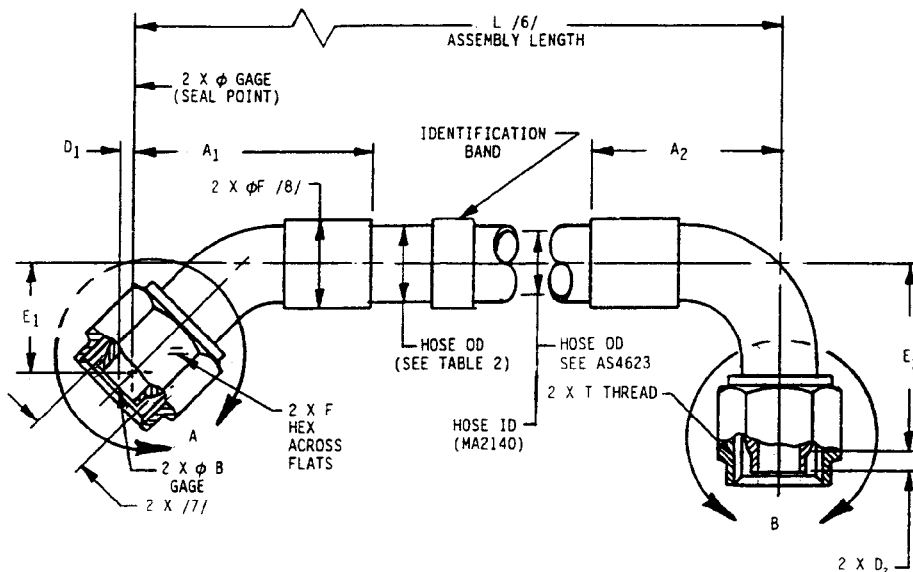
HOSE ASSEMBLY, 45° ELBOW TO 90° ELBOW
